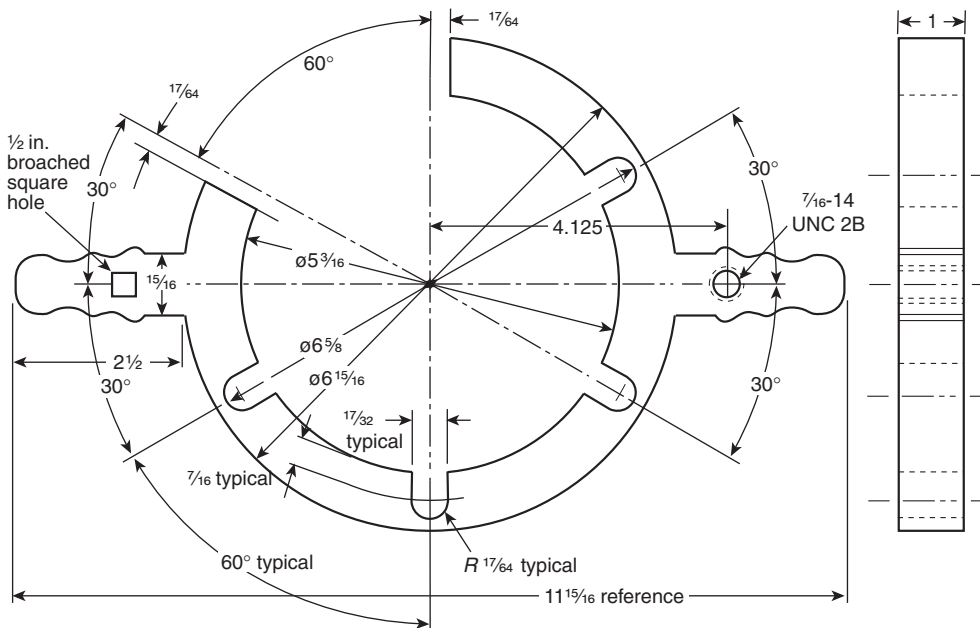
(b) End View of 5 in. (125 mm) Metal-Face Gauge and Nonthreaded 5 in. (125 mm) Connections.
